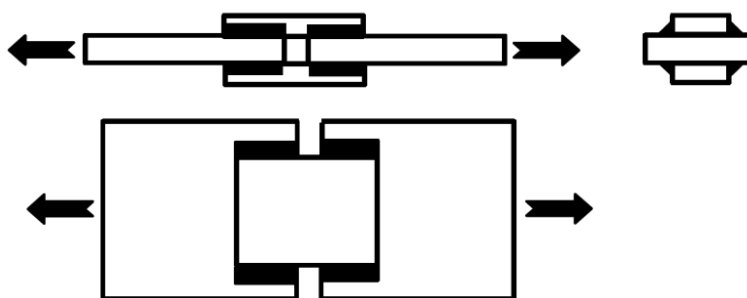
The longitudinal fillet weld tension shear specimen. Block arrows indicate loading direction (Khaled, 2005).
